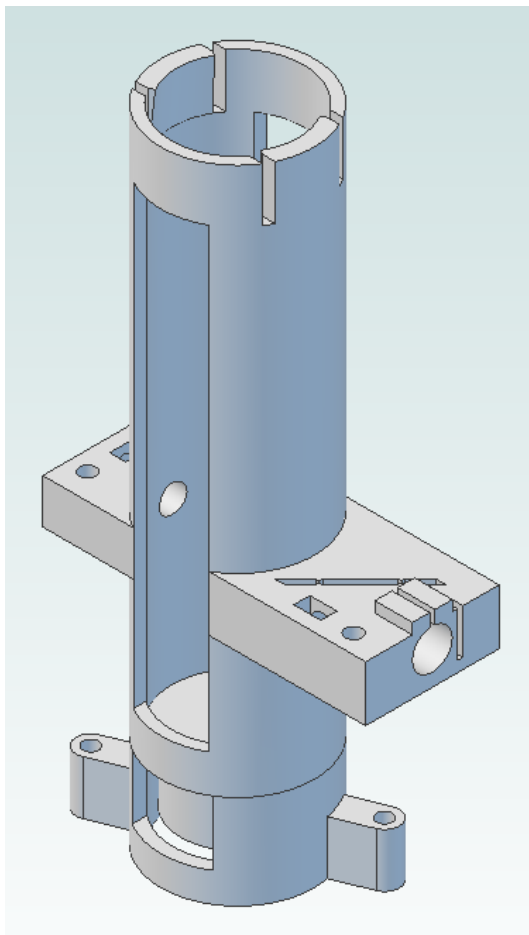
Drawing of all 3D printed parts in the main chamber assembly.
